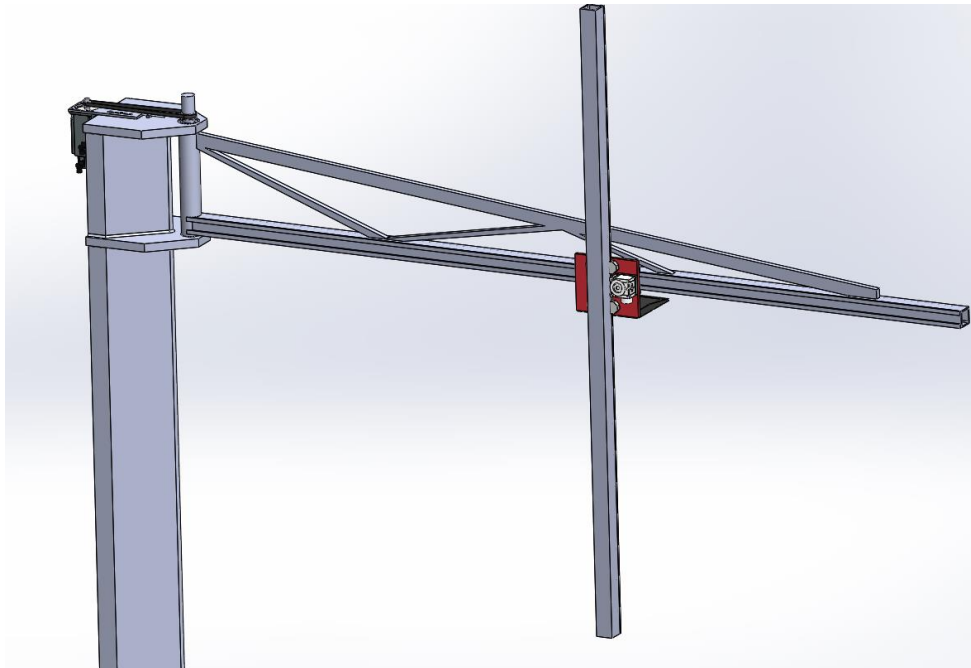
CAD model of the complete assembly of the crane. Extruder has not been mounted, nor are cables which power the motors seen.
